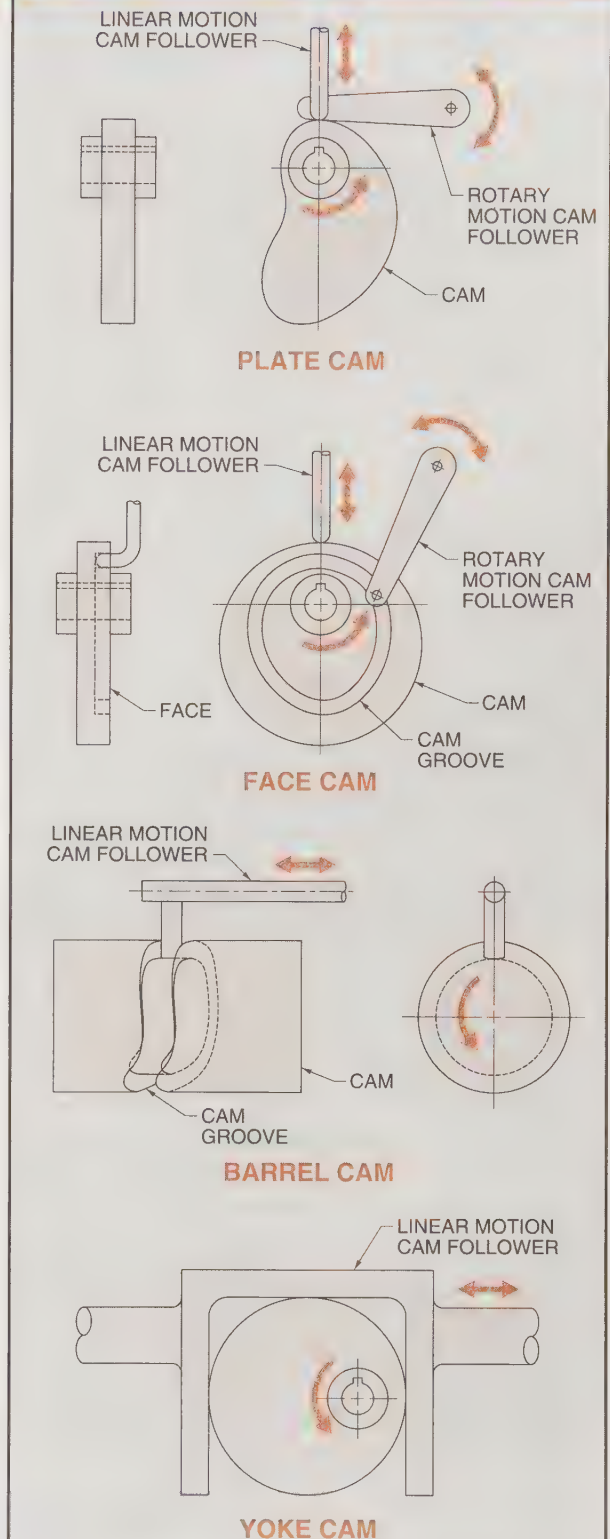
Cam motion required in the machine is accomplished by the cam design and cam follower.
